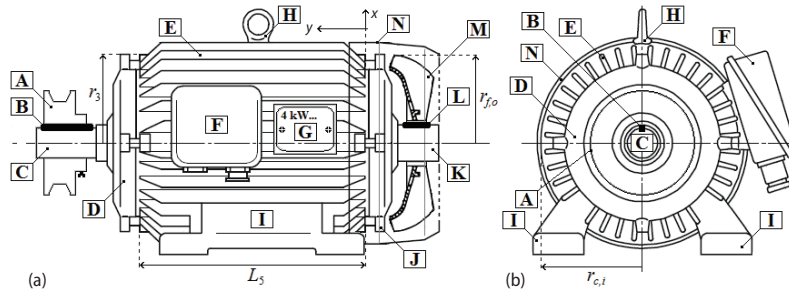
Standard TEFC induction motor; (a) side view, (b) view from the drive end of the shaft
